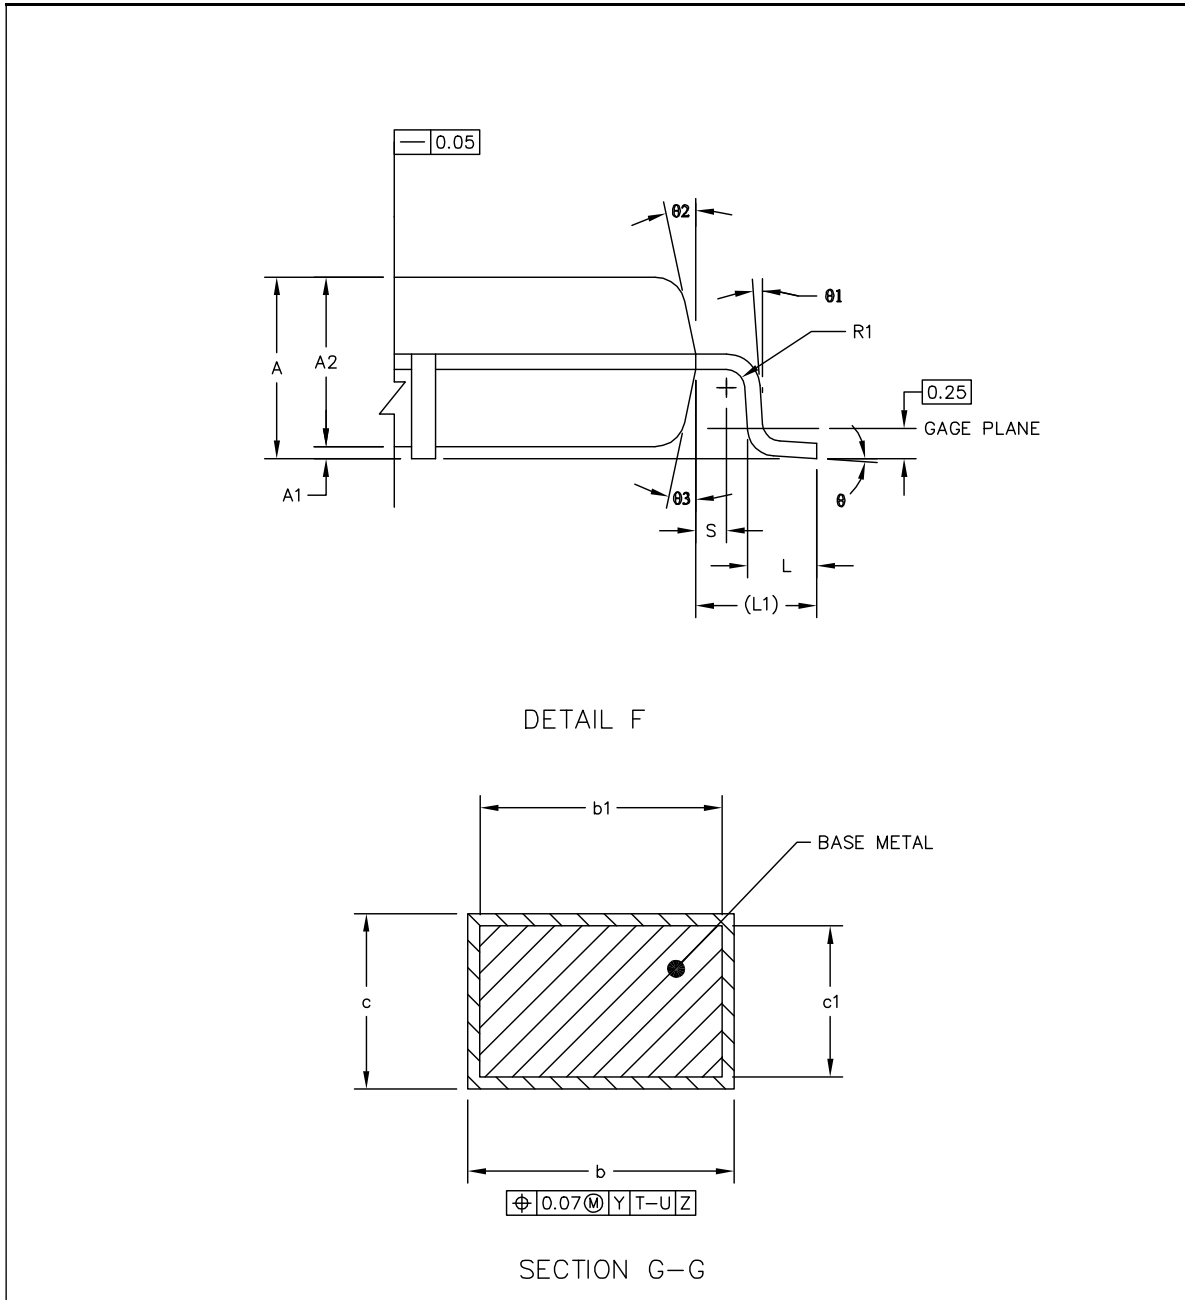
176 LQFP package mechanical drawing (Part 2 of 3)
